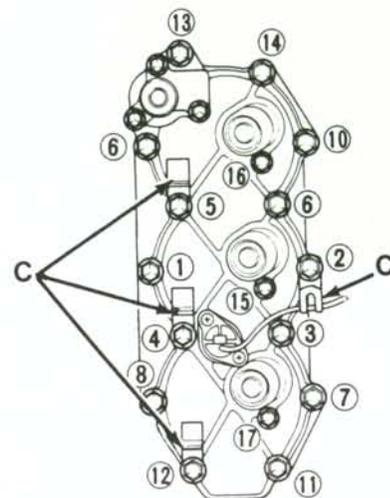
Tighten cylinder head screws in sequence shown. Tighten 6 mm screws to 8-12 N·m (6-9 ft.-lbs.) and 8 mm screws to 21-25 N·m (15-18 ft.-lbs.). Note location of clamps (C).
